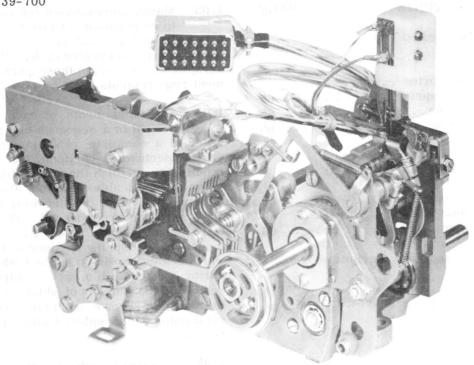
28 Non-Typing Perforator - Chadless Tape (With Code Reading Contacts, Timing Contacts and Backspace Mechanism)
